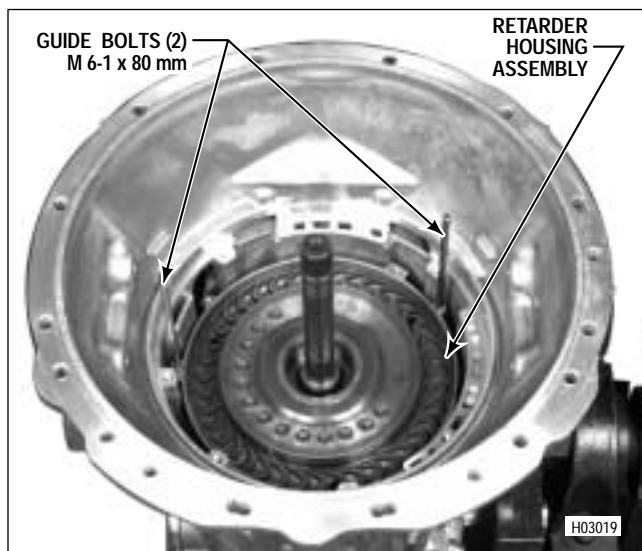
Installing Retarder Housing Assembly Guide Pins (Models With Retarder)
